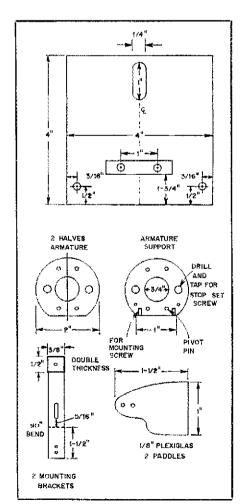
Drawings show the dimensions and shapes of the parts needed to build a CHIP.
